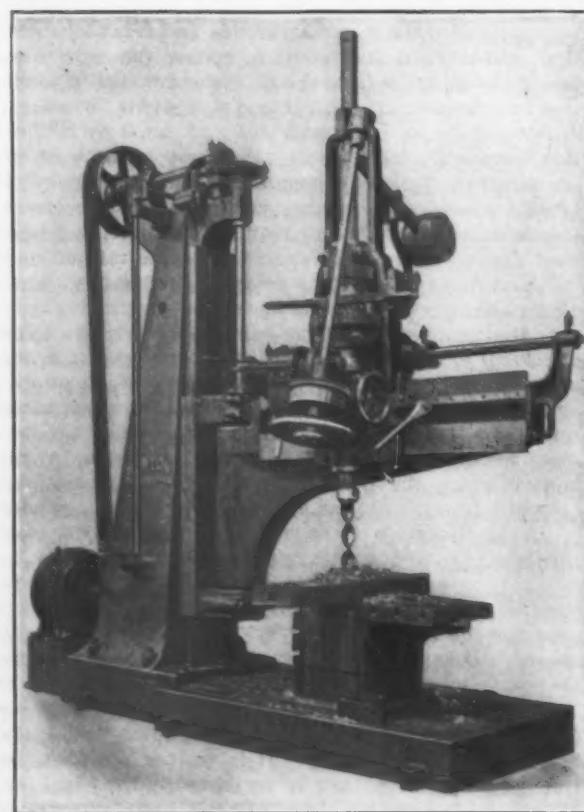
The New High Power 6-Ft. Radial Drill Built by the Newton Machine Tool Works.
